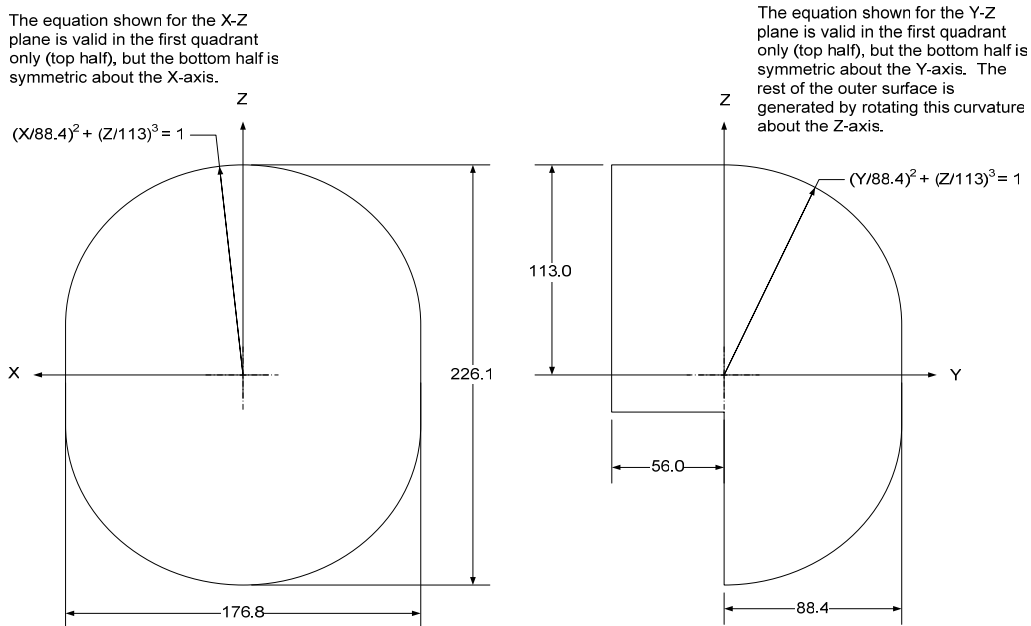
Front and Side View of Headform Outer Surface (right) with Dimensions given in Millimeters.
